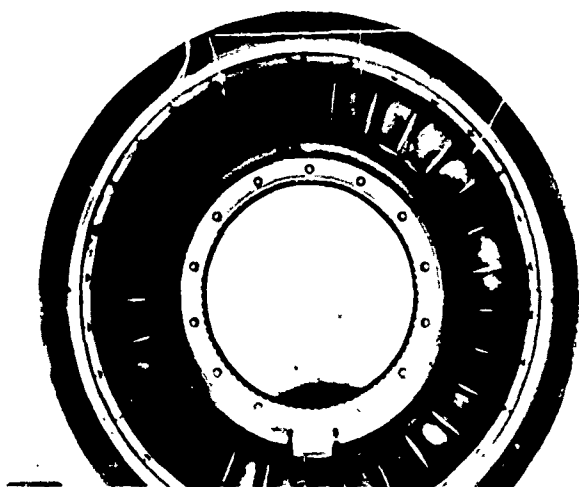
Post-test condition of T58-GE-10 engine. Second stage turbine nozzle assembly (leading edge)—uncoated INCO 713C.
